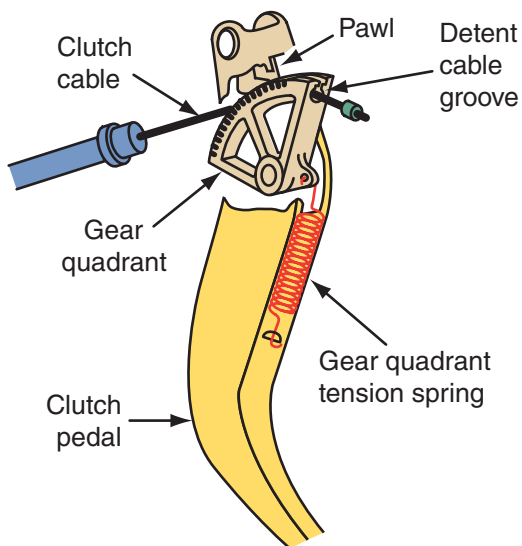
A typical clutch cable self-adjusting mechanism.
